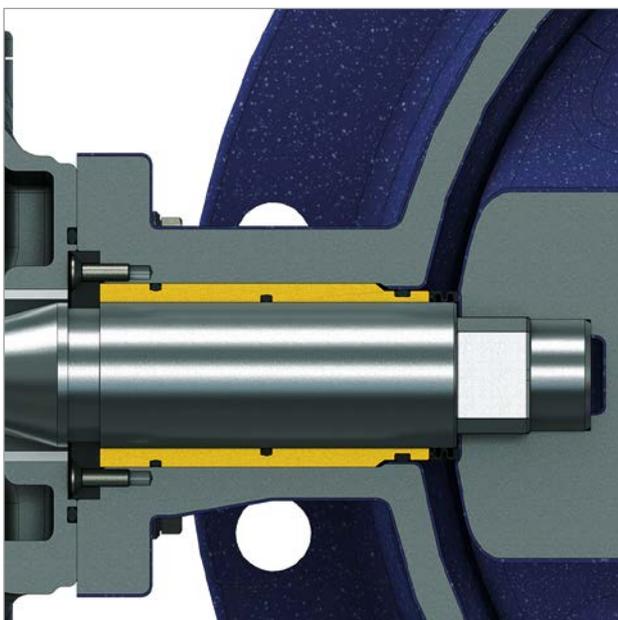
Bearing bushes, drive shaft and bearing journals are fixed to the body to be secure from blow-out
